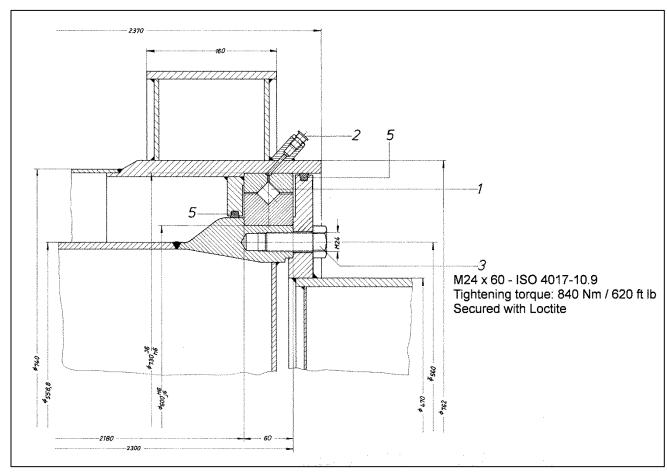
Detail drawing of the new flange for the bearing seat of the hub
